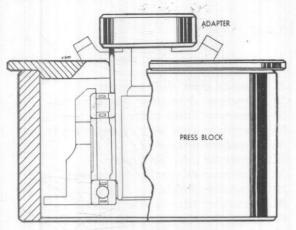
Press block T.77681 and three-pin adapter T.77682 for partly removing housing and bearings from port generator drive gear.
